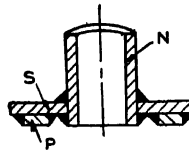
Unreinforced Welded Nozzle.
